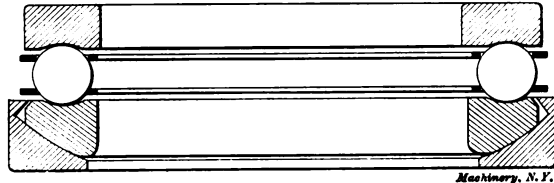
Section through Thrust Bearing, the Lower Race of which is made in Two Parts
